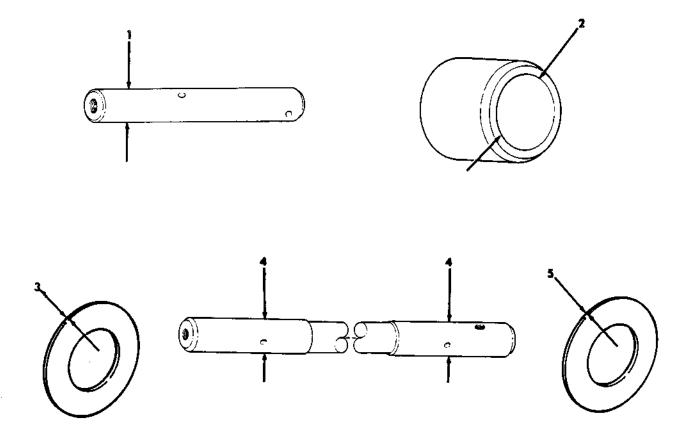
Repair and Replacement Standards; Points of Measurement for Front Winch Roller.
